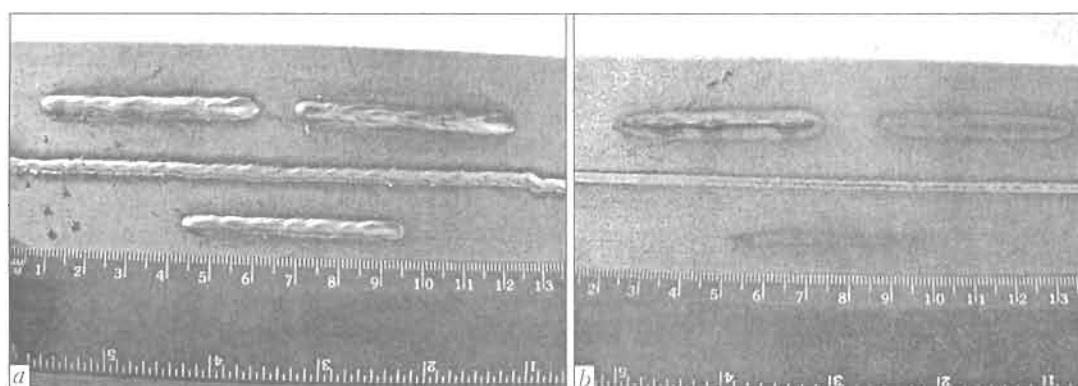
Formation of top (a) and bottom (b) surfaces of a weld
